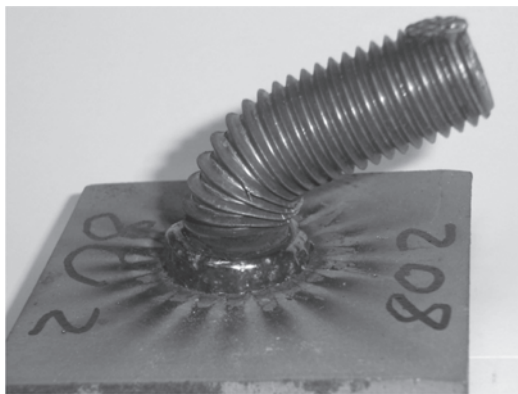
Bending test with M16 stud made of 8MnSi7, achieved bending angle: 60°. Set values (BMH30i): current 1230 A, welding time 450 ms, lift 2.5 mm, projection 3.5 mm
